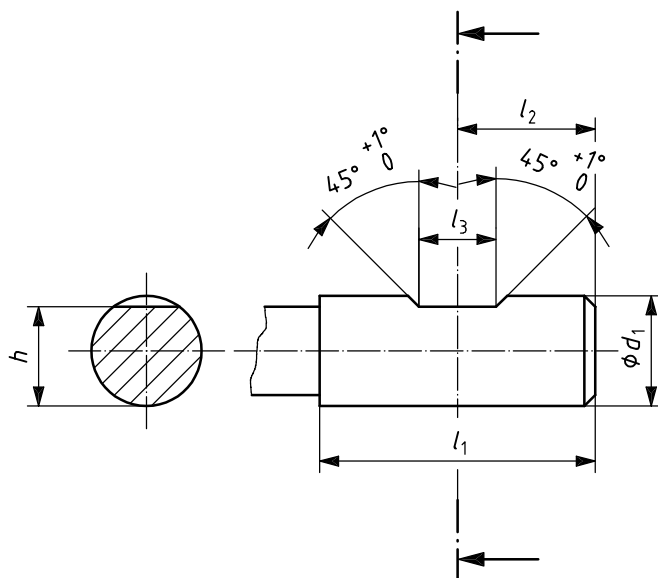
WE form — Flatted cylindrical shanks with single flat
